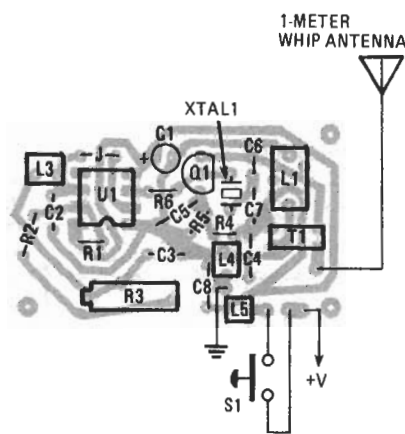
Following this layout diagram, assemble the transmitter, being mindful that the resistors are vertically mounted on the board due to tight spacing.
